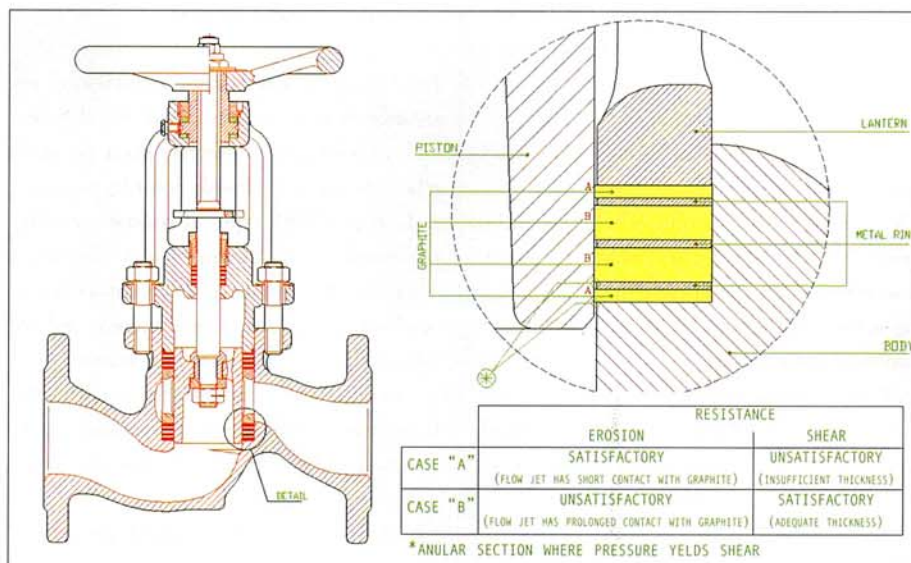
Cross-section of a piston valve, unbalanced piston design.
